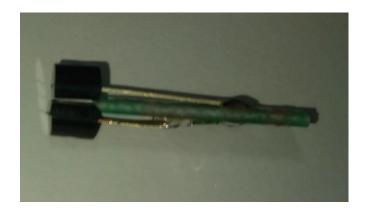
DS18b20 and 2N2222A are arranged flat surfaces to each other at a distance of about 1 mm.
